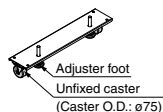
Caster adjuster-foot bracket (2 pcs.)
